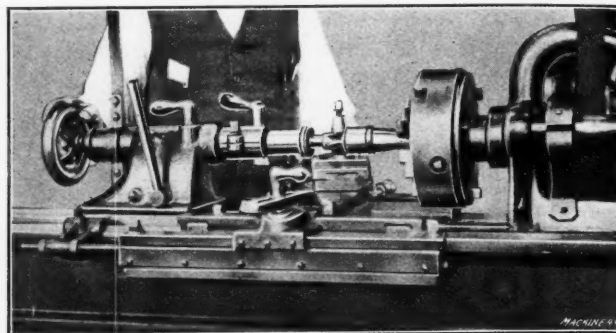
Taper Reamer mounted in the "Satco" Drill Holder
